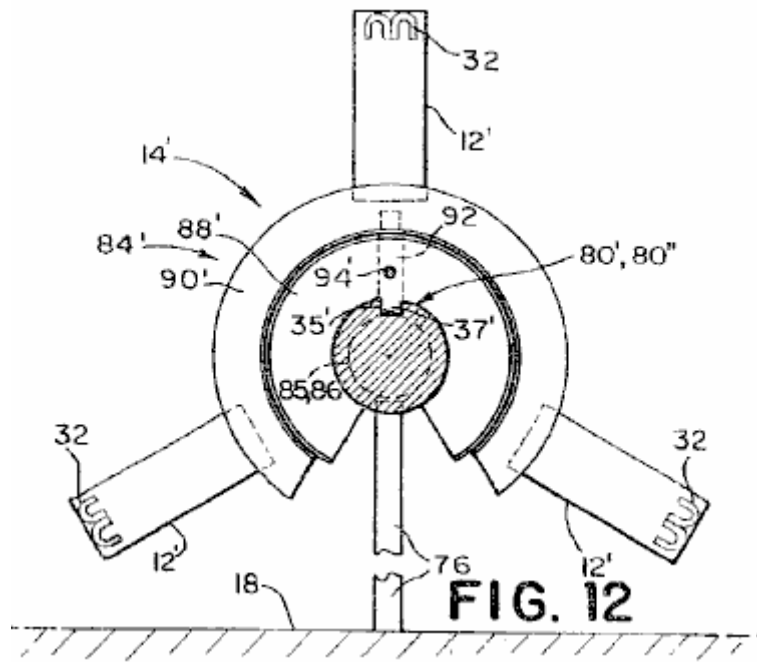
is an end elevational view of the rotor assembly shown in Fig.11B, further including a rail mounting post;
